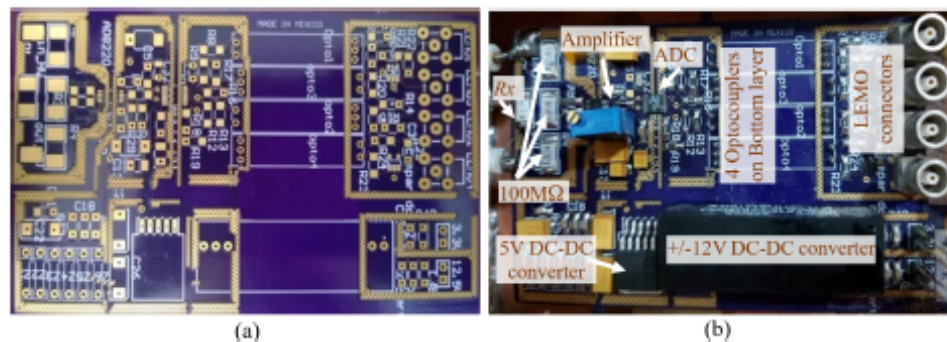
Photo of the PCB. (a) PCB without components and (b) PCB with components mounted.
